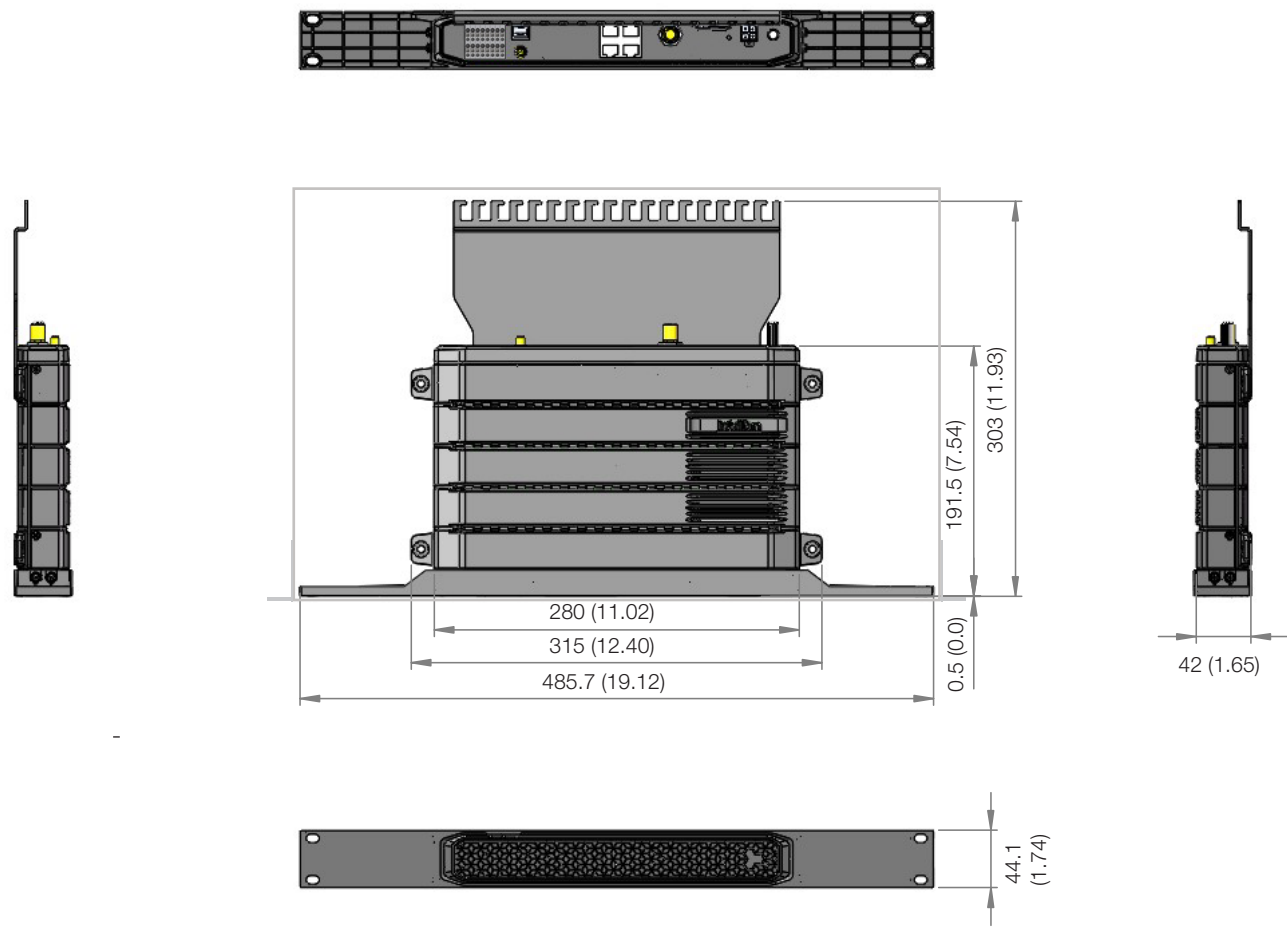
BDU dimensions (installed using 19-inch BDU Rack Mount Kit)
